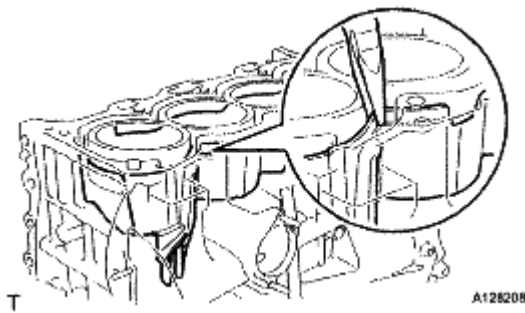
Identifying Cylinder Block Water Jacket Spacer
